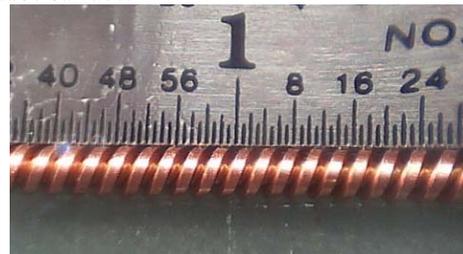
Scaled view on the undulator windings [2]. Wire with rectangular cross-section has dimensions  $0.6 \times 0.6$  mm<sup>2</sup>, period  $\cong 2.54$  mm.
